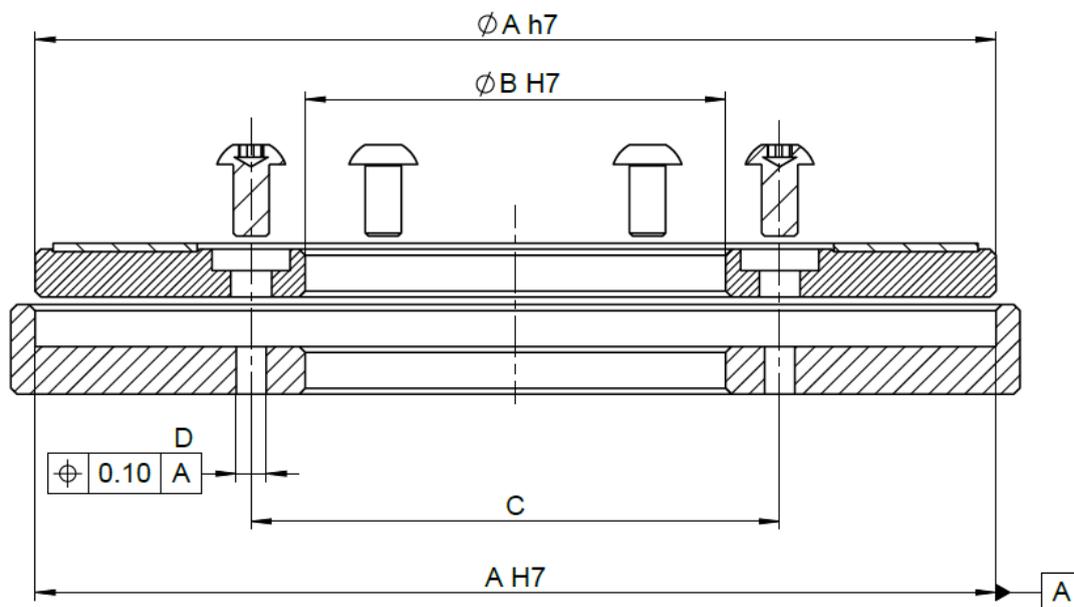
Rotor (GAR) mounting using OD sliding fit
